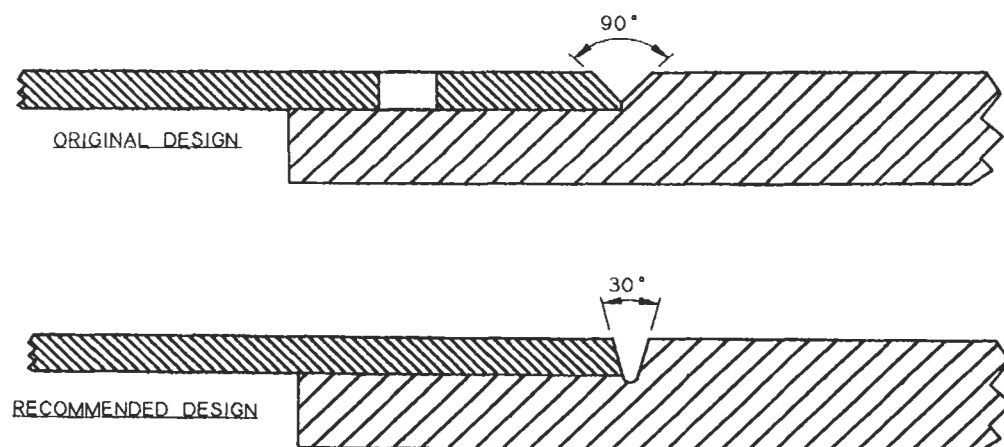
Schematic drawings of the original and recommended weld preparations.
